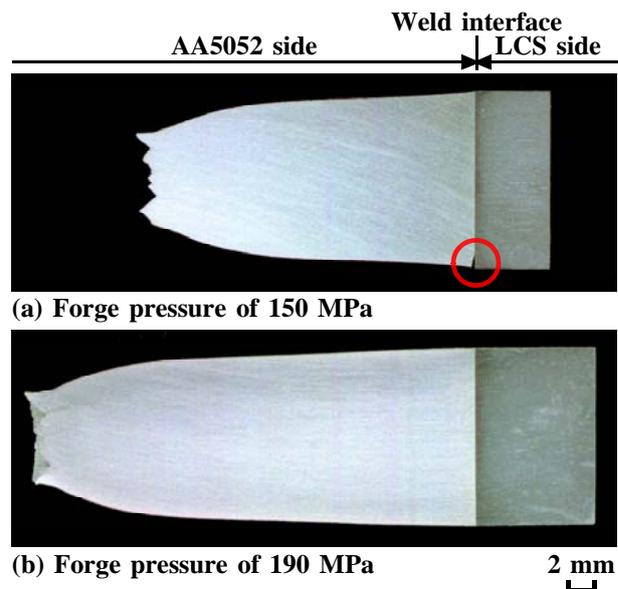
shows the cross-sectional appearances of the joint tensile test specimens with the AA5052 base metal fracture after tensile testing. The joint at a forge pressure of 150 MPa had cracks at the periphery portion of the weld interface after tensile testing, which was indicated by a circle as shown in Fig. 9a. On the other hand, the weld interface of the joint at a forge pressure of 190 MPa had neither a not-joined region nor a defect after tensile testing, as shown in Fig. 9b. In addition, these joints have no IMC, as shown in Fig. 5a. That is, the joint had 100% joint efficiency and the AA5052 base metal fracture with no crack when it was made with high forge pressure. Thus, to obtain 100% joint efficiency and the AA5052 base metal fracture with no crack at the weld interface, the joint should be made with high forge pressure, and with opportune friction time at which the entire weld interface of the LCS side had the transferred AA5052.
